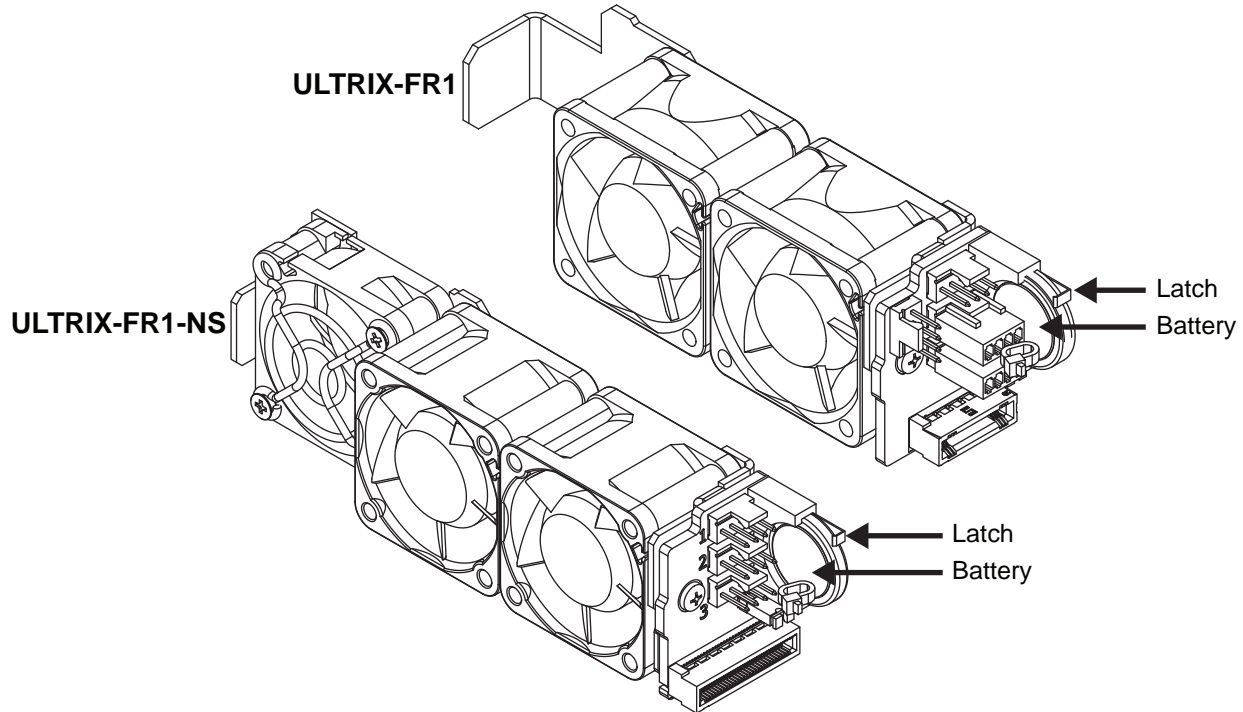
Battery Location inside the Cooling Fan Module — ULTRIX-FR1 and ULTRIX-FR1-NS
